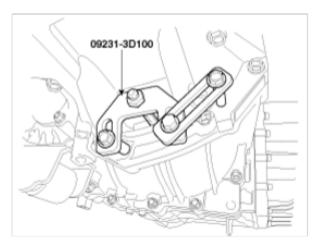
Tightening Holder And Links Securely Bolts And Nuts Using SST (09231-3D100) Courtesy of HYUNDAI MOTOR AMERICA
